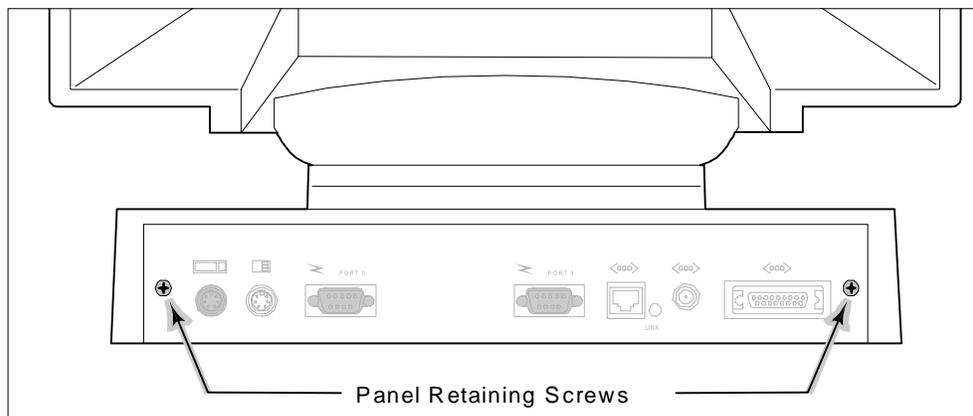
Integrated Cabinet Rear Panel Retaining Screws
